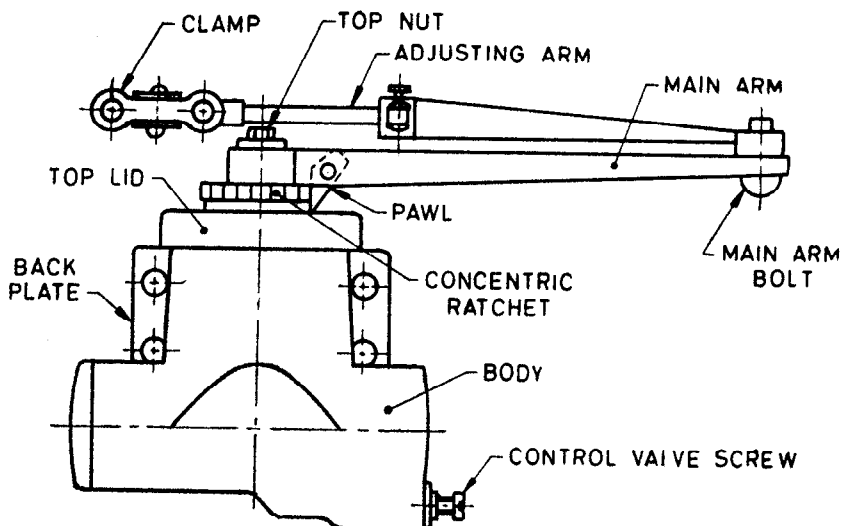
A TYPICAL ILLUSTRATION OF HYDRAULICALLY REGULATED DOOR CLOSER (BOTTLE TYPE)
